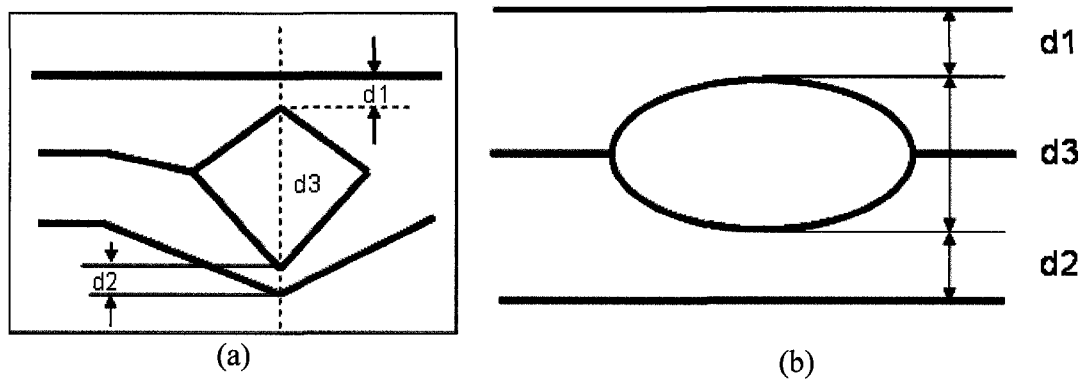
(a) schematic pattern of the weld signature; (b) schematic view of vertical weld geometry.
